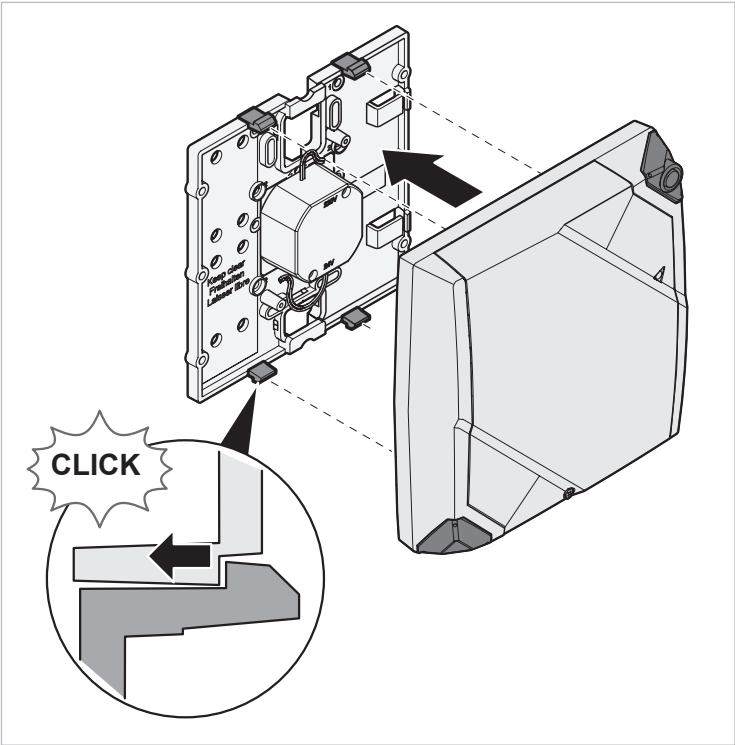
Attaching the localisation marker onto the universal mounting plate
